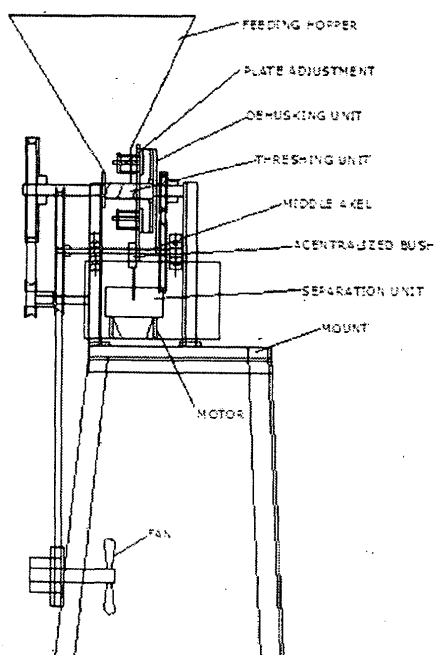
Fabricated finger millet threshing, de-husking and cleaning machine
